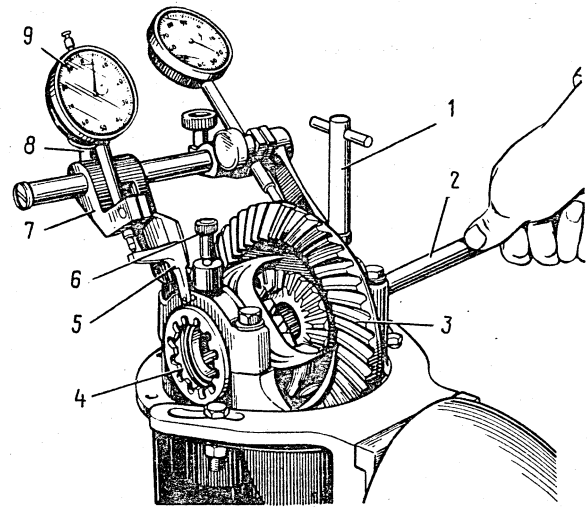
Checking the Preload of Pinion Cage Bearings with Gauge A.95688/R:
